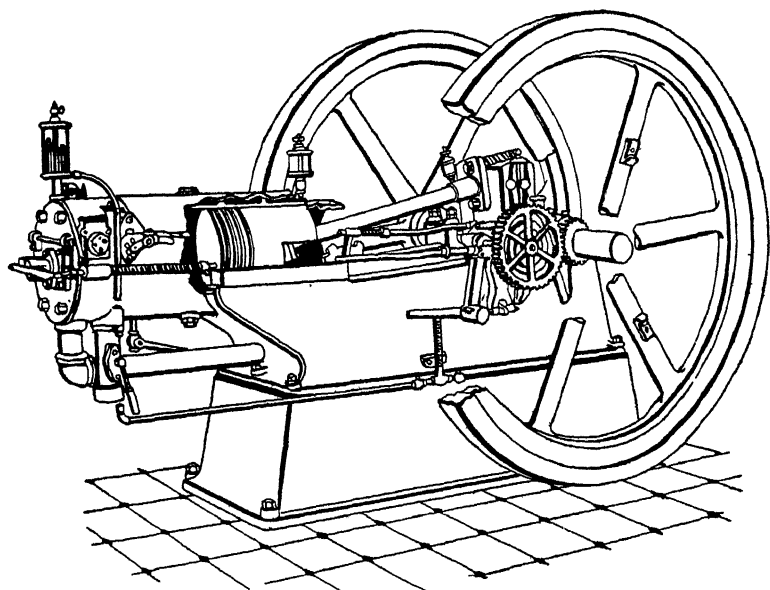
WAYNE GAS AND GASOLINE ENGINE.
